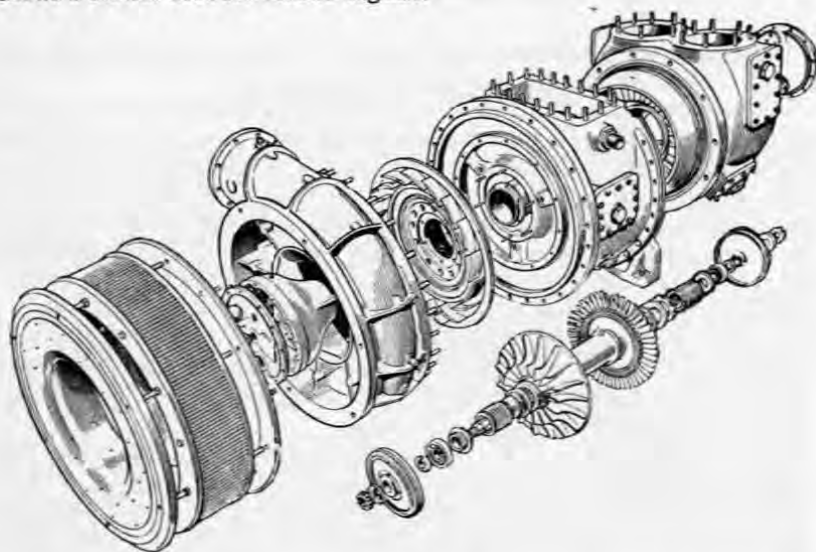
Exhaust gas turbo-compressor used as a supercharger in compression-ignition engines.
